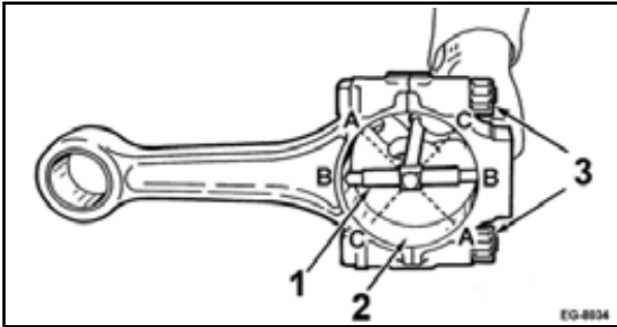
Measuring the Connecting Rod Bearing Bore for Out-of-Round
